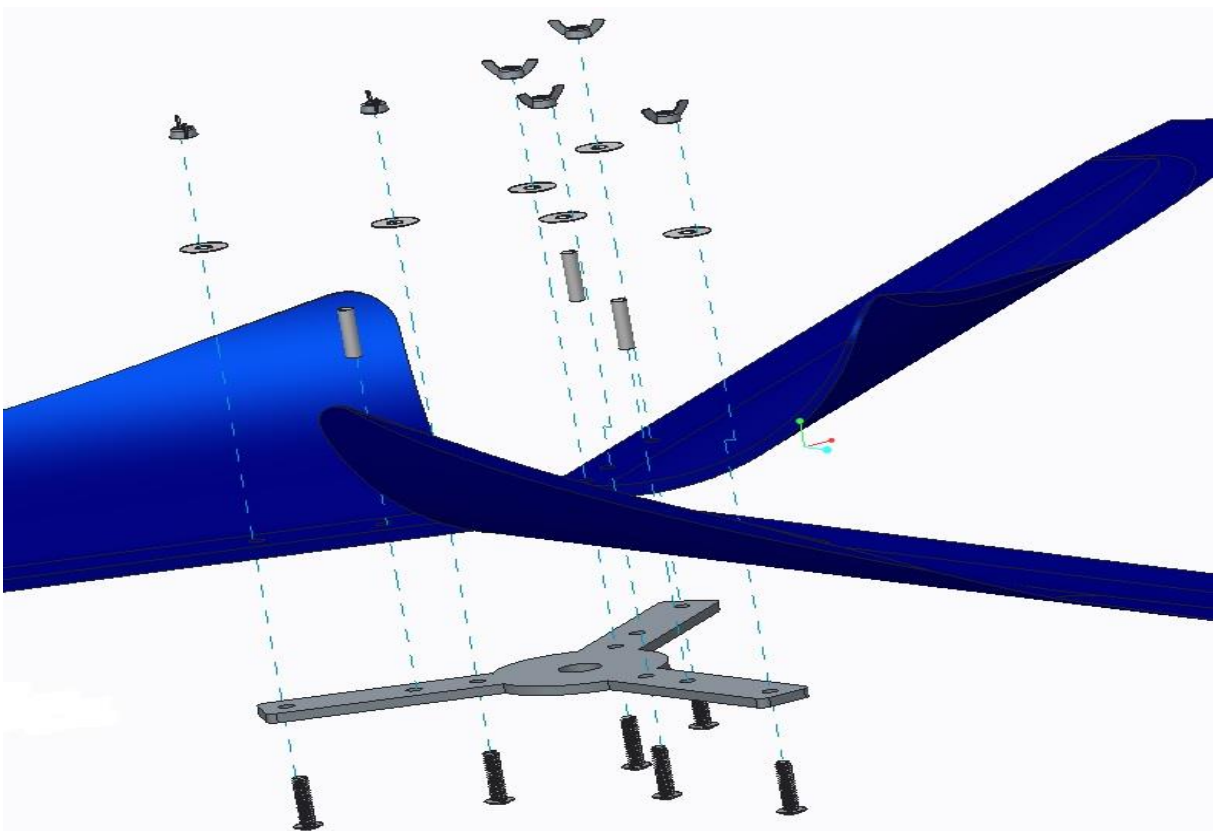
Hub designed to mount blades to the alternator shaft.
